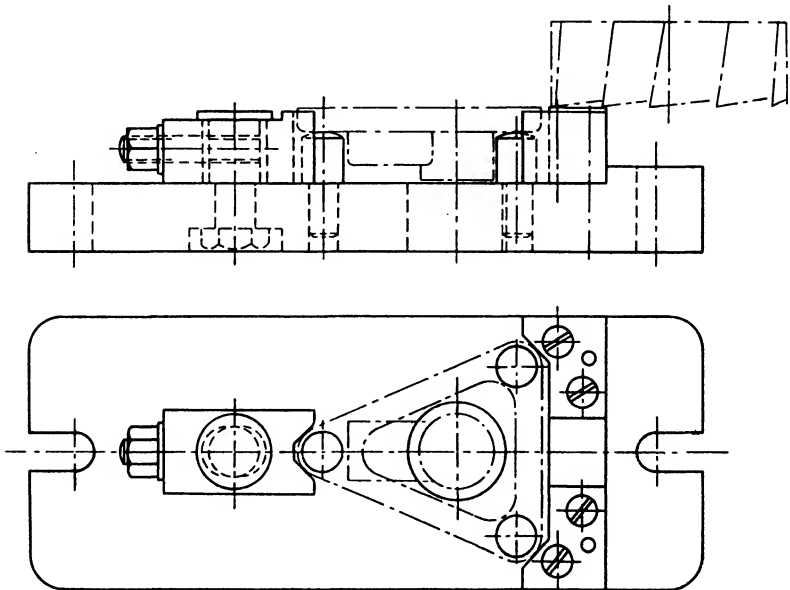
FIRST OPERATION MILLING JIG (J 1)
